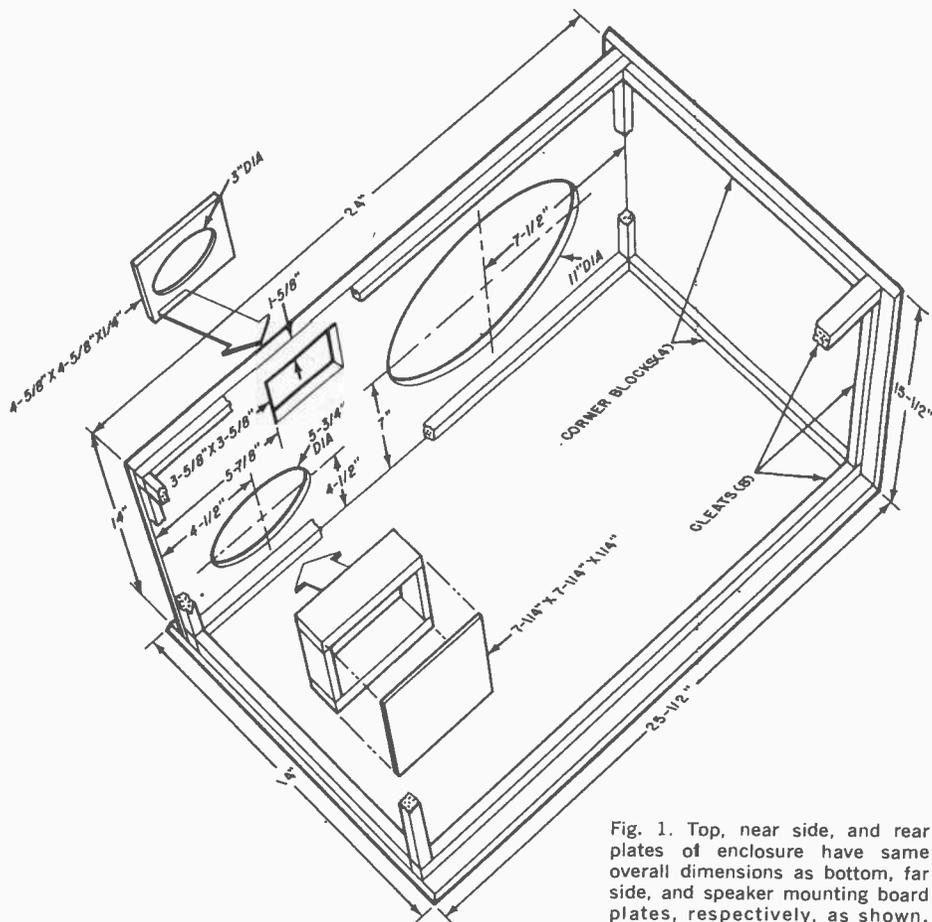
Top, near side, and rear plates of enclosure have same overall dimensions as bottom, far side, and speaker mounting board plates, respectively, as shown.
